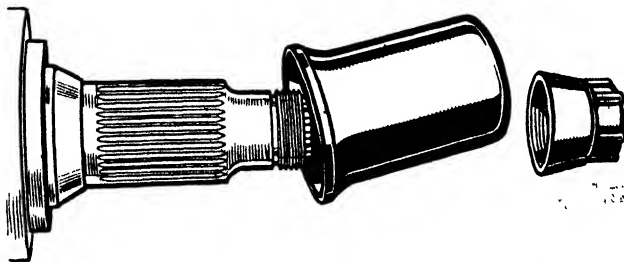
The airscrew shaft of the engine, protected from damage during final assembly by a cap.
